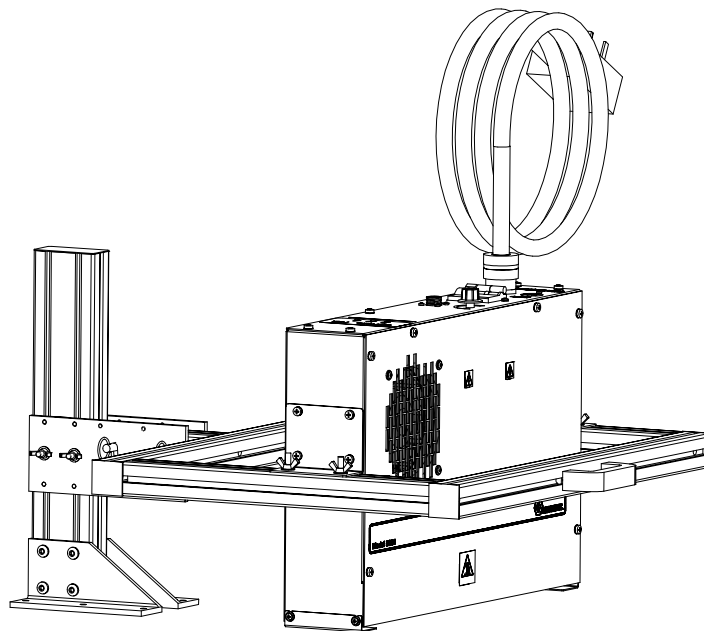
Model 5061 Speed-Dri Mounted to the Optional Extruded Aluminum Mounting Bracket.
